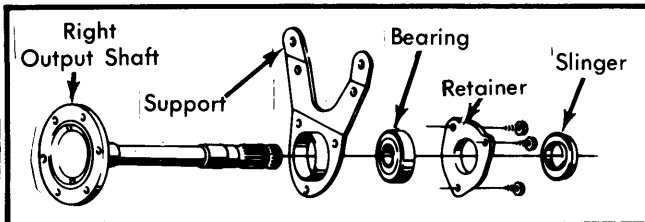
Exploded View of Right Output Shaft and Support Bearing Assembly
